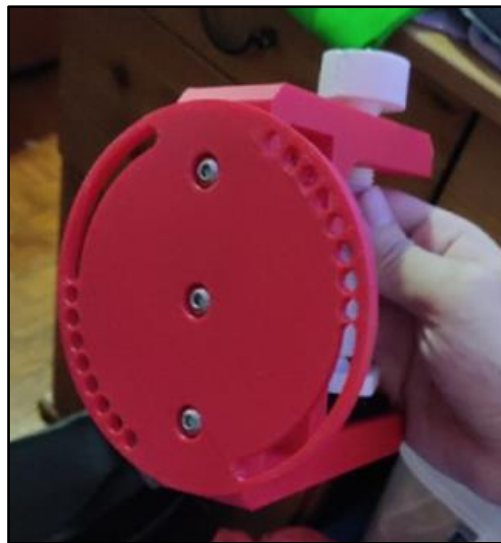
Rotary Dial and C-Clamp Mount Assembly
